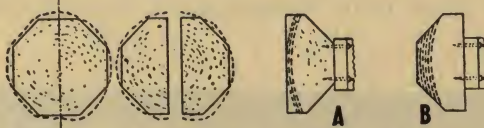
Detail of mounting flitches for half-round cutting.
